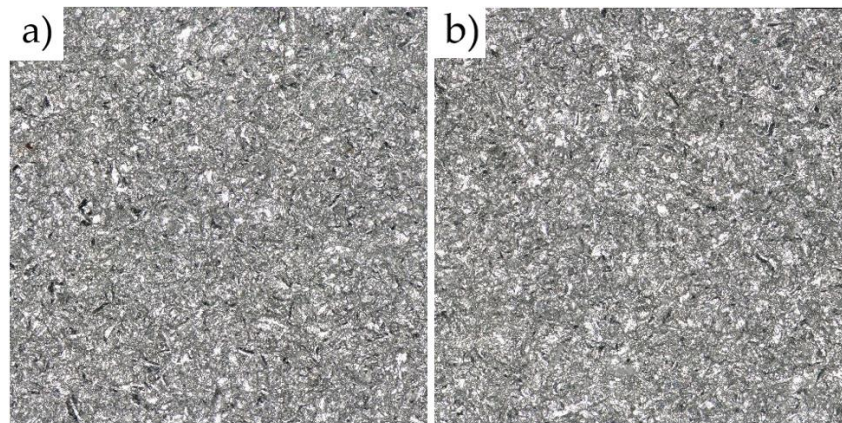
Surface grinded with abrasive fabric No. 80, 3M (a) and grinded and washed with primer (b)
